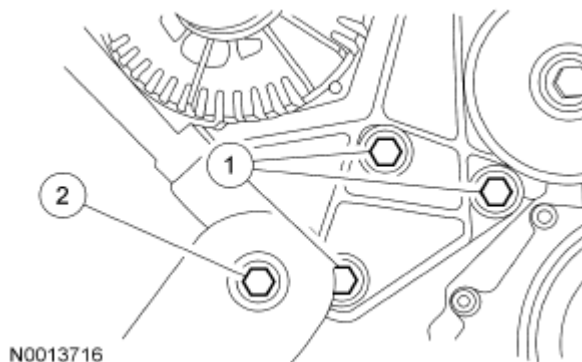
Locating Generator Mounting Bracket Bolts And Drive Belt Tensioner Bolt
